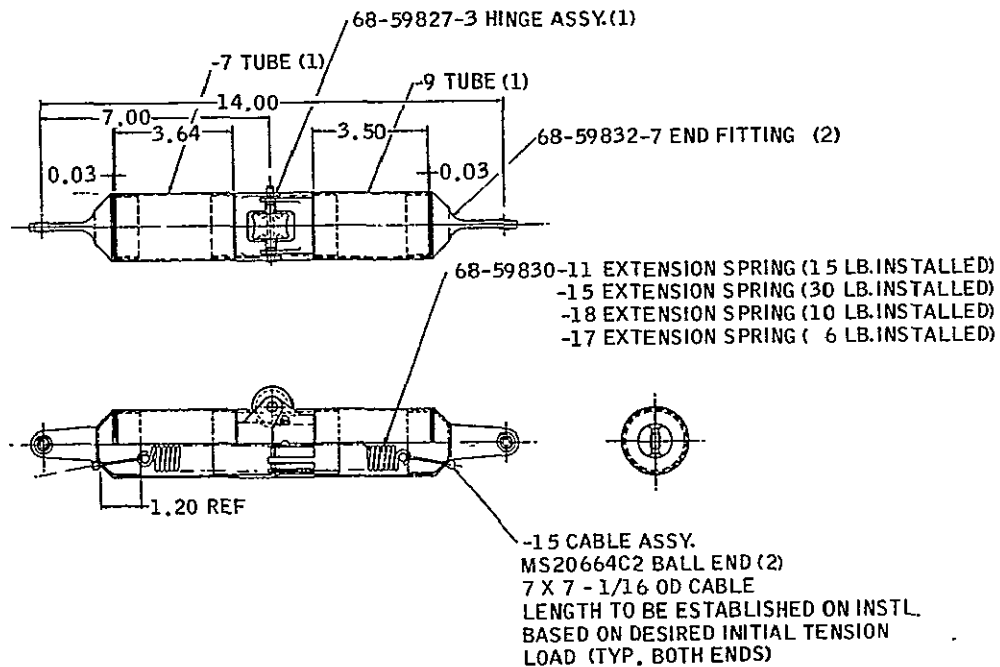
Test Specimen, Tension Spring Hinge Assembly
